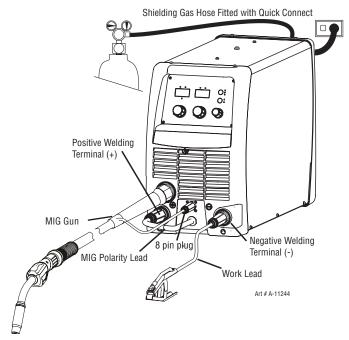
Setup for MIG Welding with Gas Shielded MIG Wire
